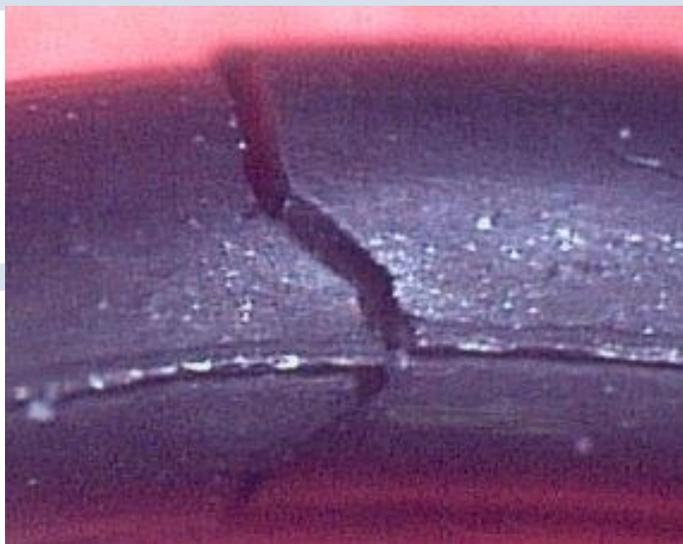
Manufacturing crack, parabolic and symmetrical to the mold parting line
